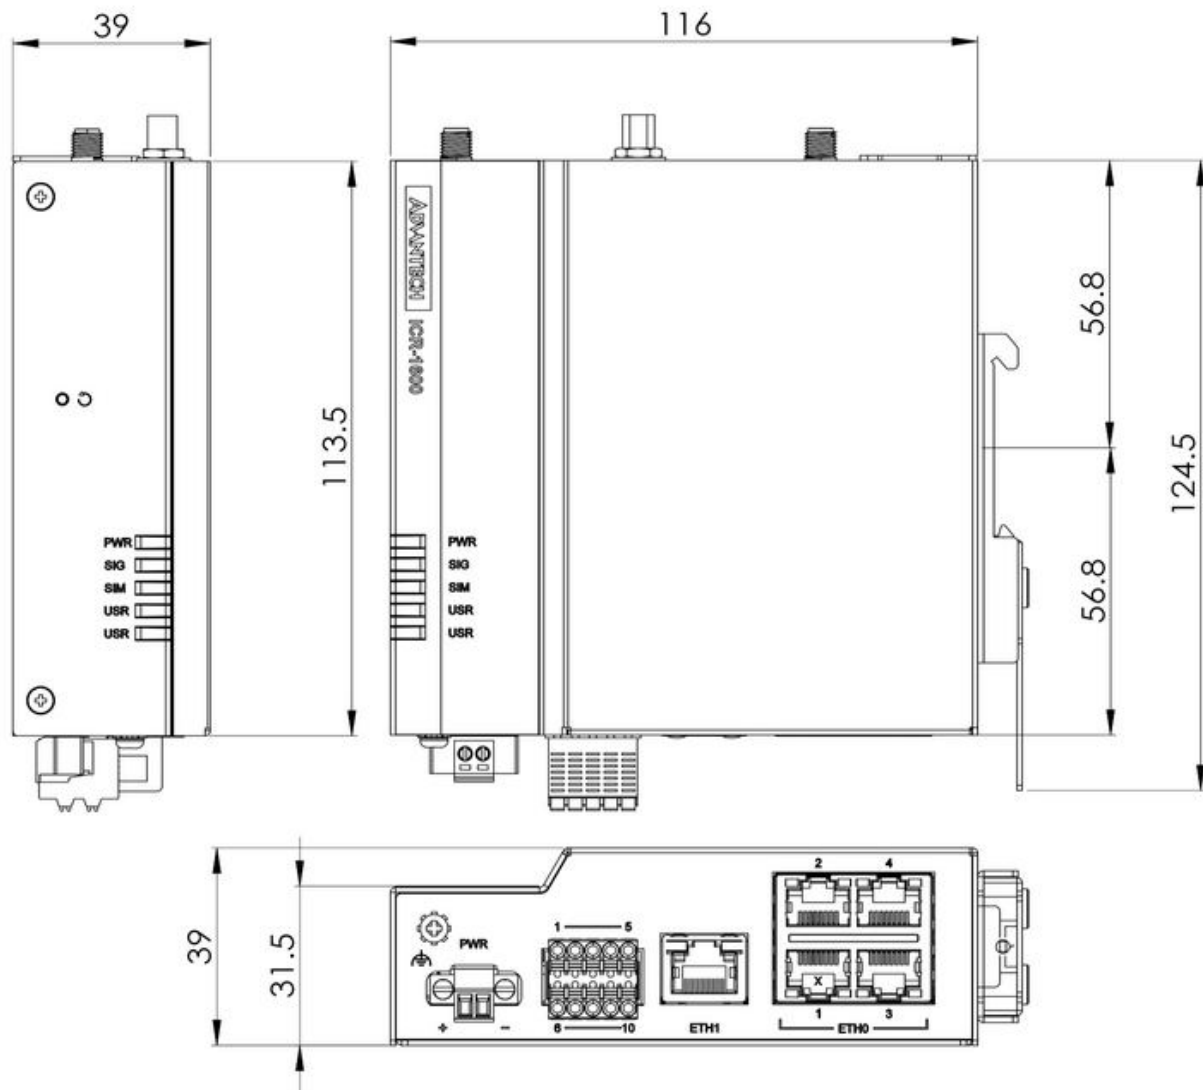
Router dimensions – Front, Top and Side view with DIN holder
